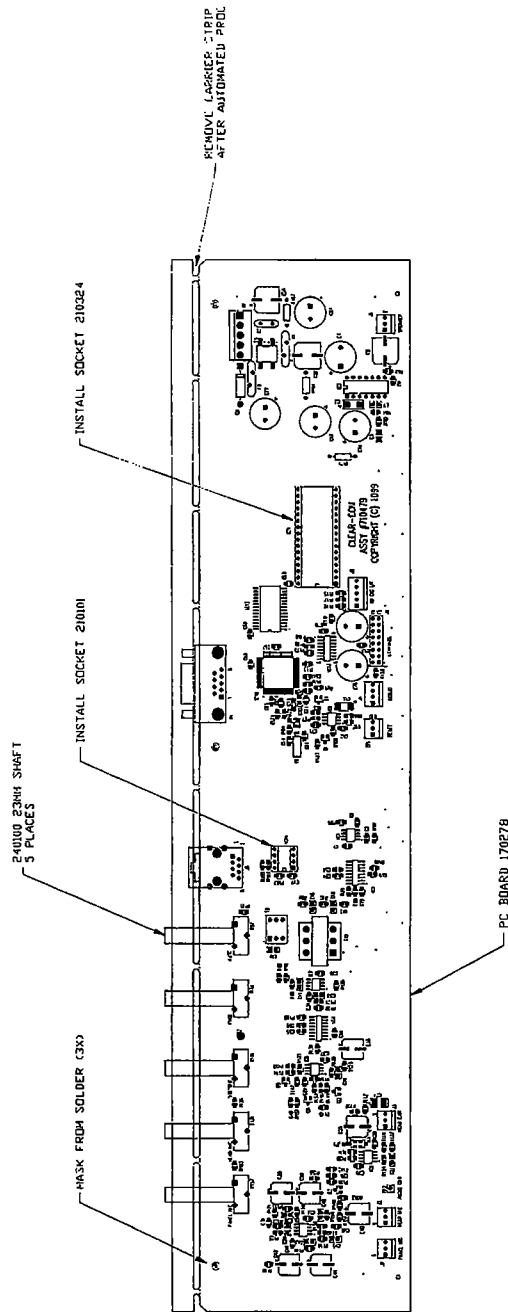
Assembly Drawing—ICS-1016/ICS-1008
